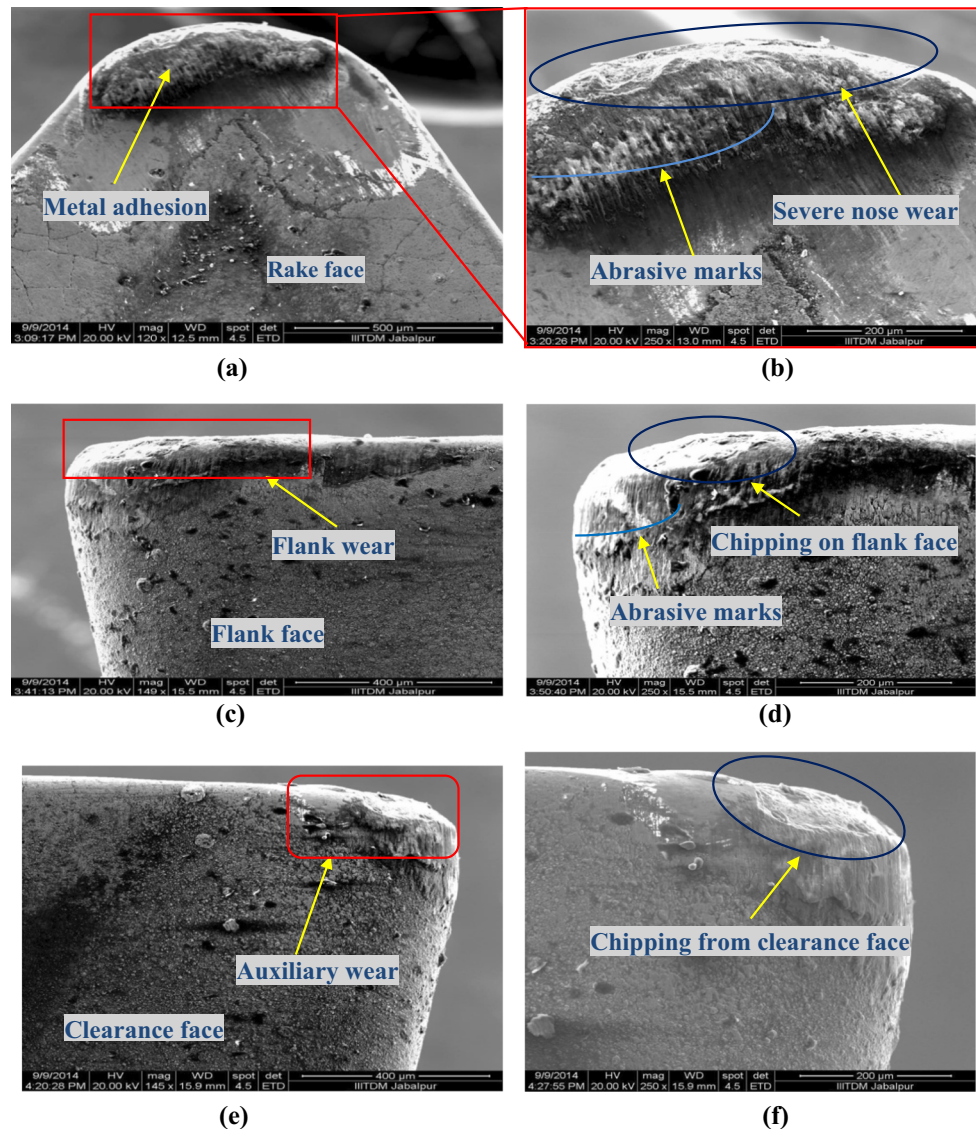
SEM views of worn-out insert under dry cutting condition a crater wear, b close-up view of crater wear, c flank wear, d close-up view of flank wear, e auxiliary wear, f close-up view of auxiliary wear
